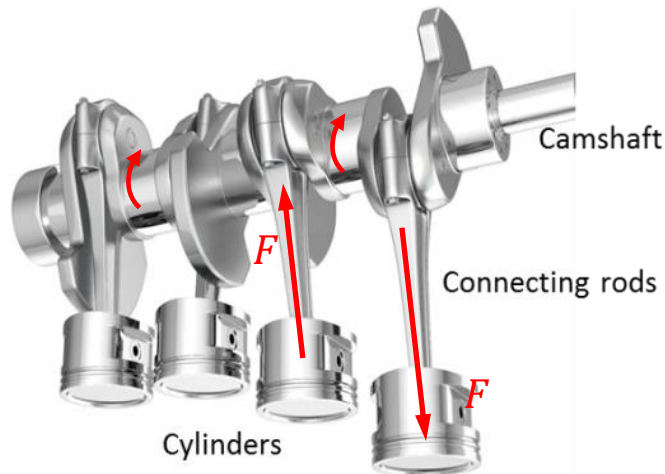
Illustration of multi-loading sources subjected by a camshaft of engine
